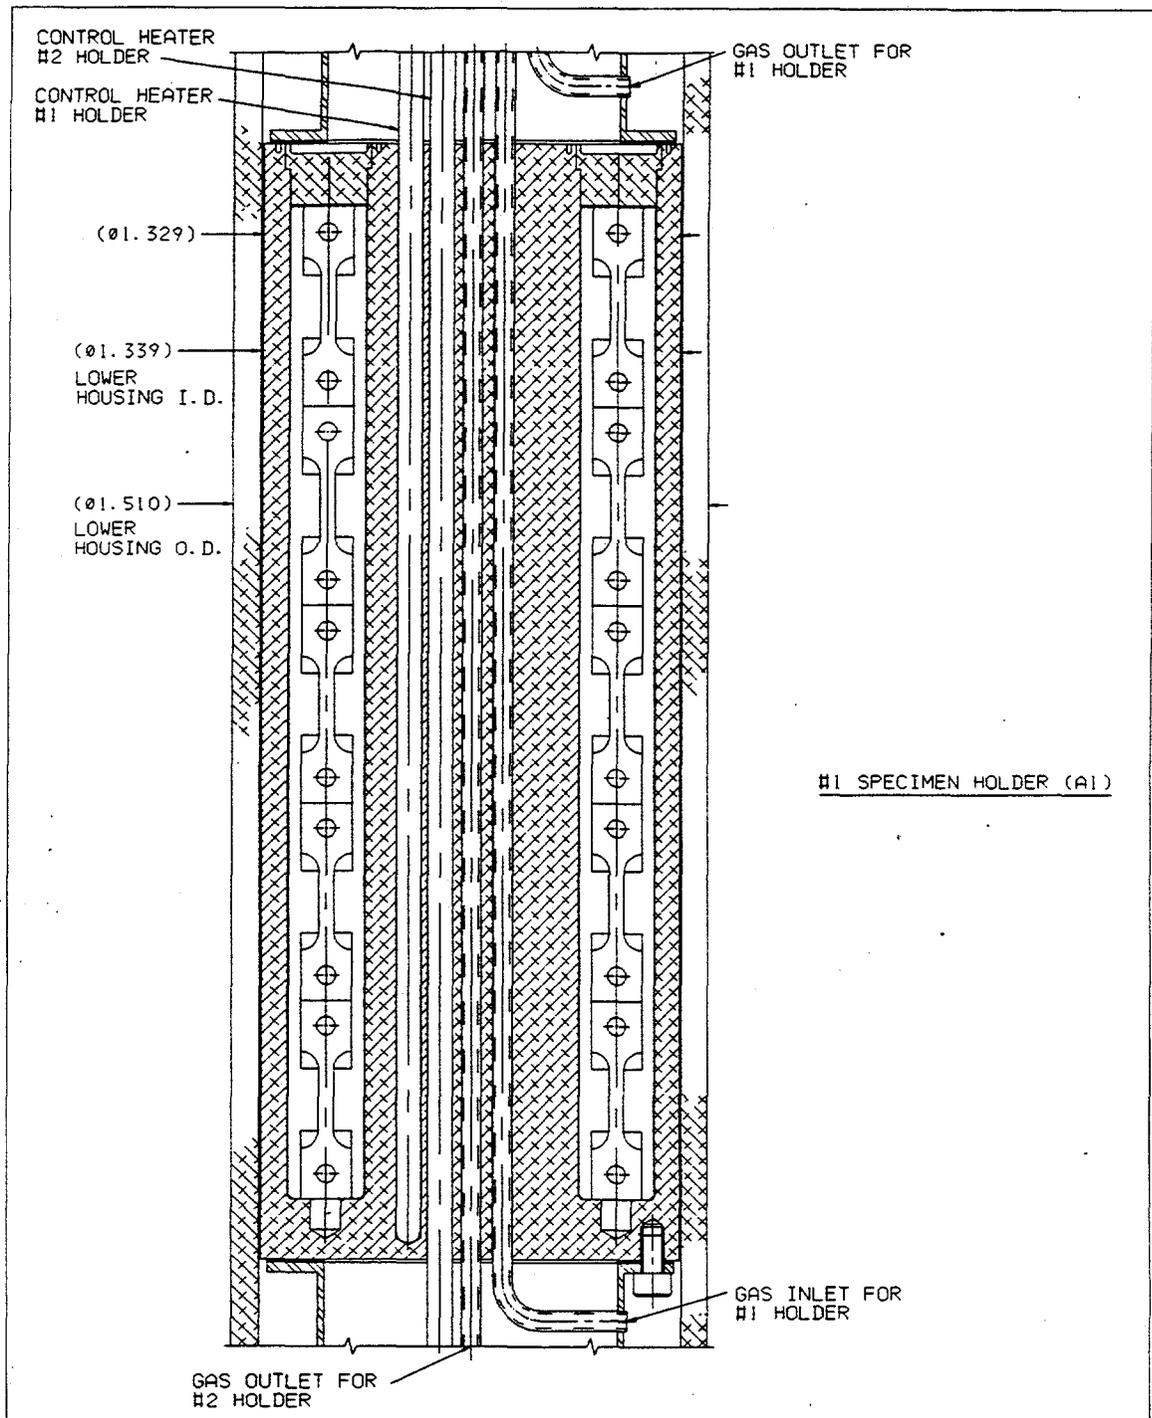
A specimen holder. The specimens are encased in sleeves, which are inserted into holes drilled into the face of the holder. Caps are welded at the end of the holes to seal the specimens in a static helium atmosphere. The inner radius of the housing tube and the outer radius of the holder defines the temperature control gas gap for the holder.
